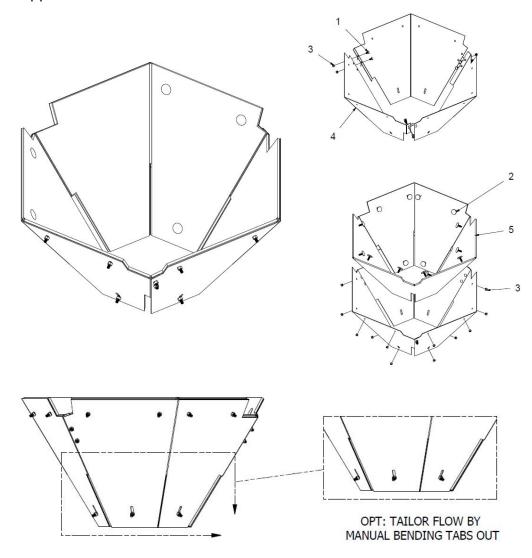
Hopper Assembly - Three Side Intake and Liner
